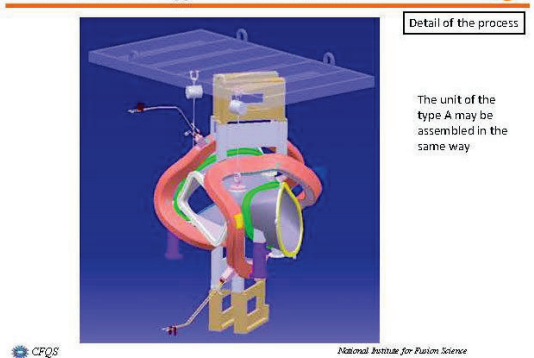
Pre-assembly process of modular coils and vacuum vessel on sit.
